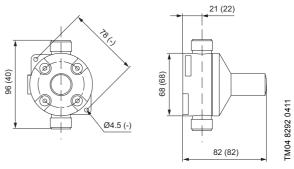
Pressure loading valve. Dimensions in brackets apply to stainless-steel version.
